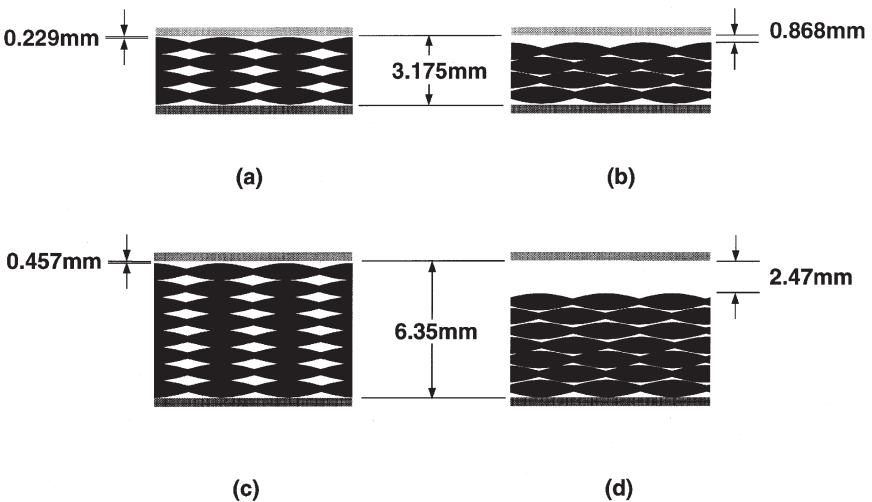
Schematic of fabric in mold, using experimental dimensions, for (a) 4 layers in 3.175-mm thick mold, ply shift = 0, (b) 4 layers in 3.175-mm thick mold, ply shift = $S/2$, (c) 8 layers in 6.35-mm thick mold, ply shift = 0, (d) 7 layers in 6.35-mm thick mold, ply shift = $S/2$.
